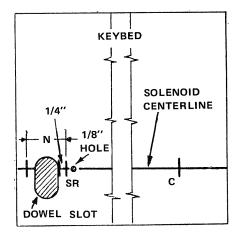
Measure dimension N and mark the Solenoid Center-line.
